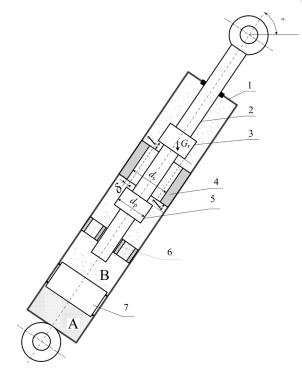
Shock absorber of resonant oscillations: 1 — cylinder housing; 2 — two-point rod; 3, 5 — hydraulic piston; 4 — sleeve; 6 — pin bush; 7 — compensating gas piston; A — cavity filled with gas; B — cavity filled with liquid;  $G_r$  — gravity force of the rod with the hydraulic piston;  $d_s$  sleeve diameter;  $d_p$  — piston diameter;  $\delta$  — gap between the two-point rod and the sleeve; *I* — distance from the sleeve to the hydraulic piston;  $\alpha$  — shock absorber installation angle and inertia  $P_i$  of the moving two-point rod with the hydraulic piston:
